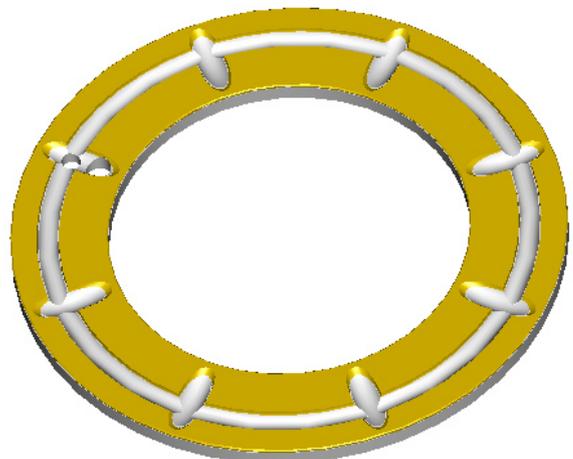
Standard bronze thrust bearing; refer also Figure 38, Page 25
